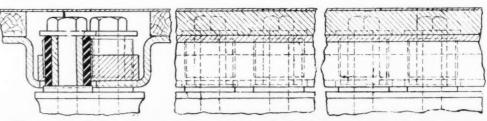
Installation of Lord engine mount on A.C.F. Metropolitan coach. The mountings are in the inverted position, the engine being hung below the frame
